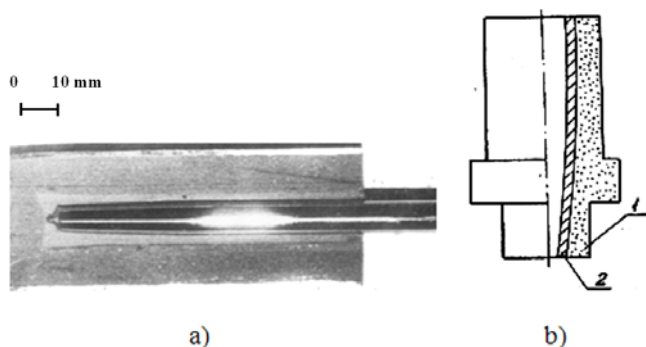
Multilayer part: a – section; b – scheme; 1 – frame from Fe-Cu powder material; 2 – facing layer from Ni-Co alloy
